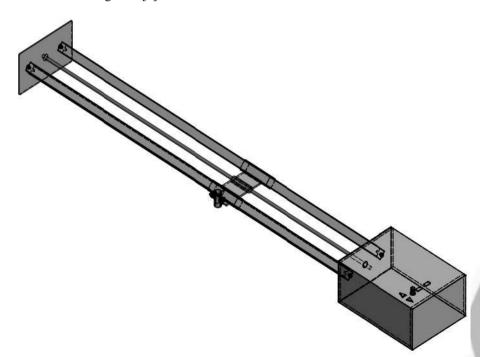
Design of 1 (one) axis plasma cutting torch rail mechanism [9]
